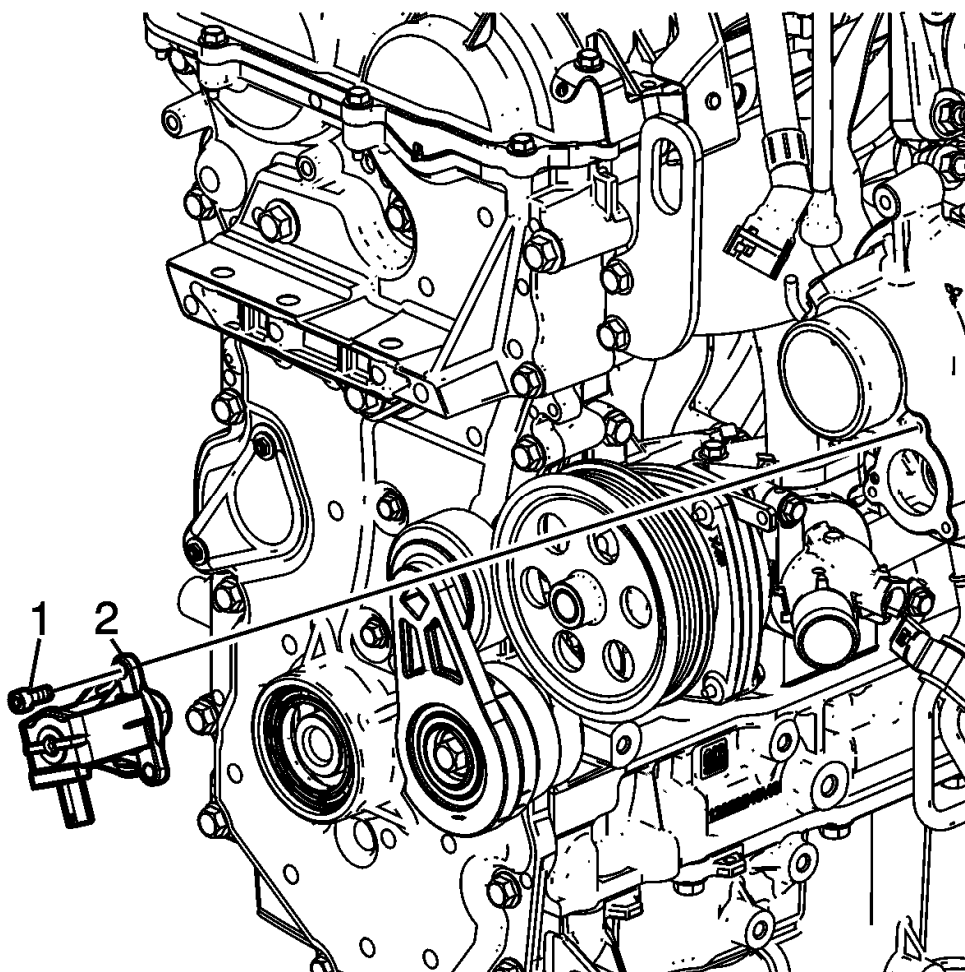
Turbocharger Bypass Valve Solenoid Bolts
